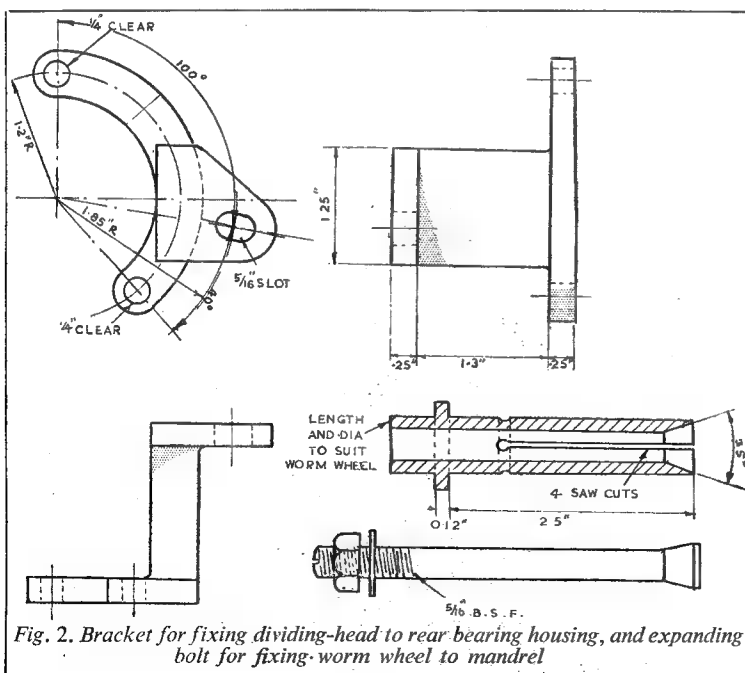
Bracket for fixing dividing-head to rear bearing housing, and expanding bolt for fixing worm wheel to mandrel
